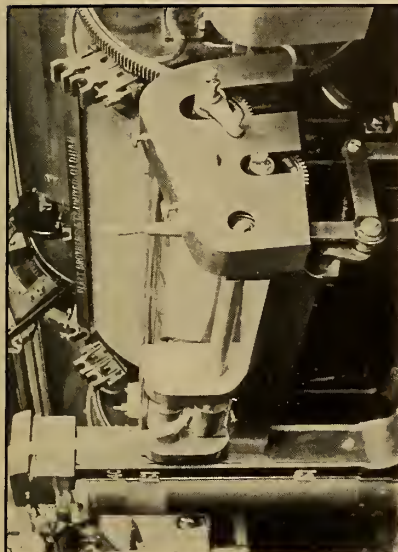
GUARDS ON DOFFER AND CARRIER WHEELS OF CARDING ENGINE
